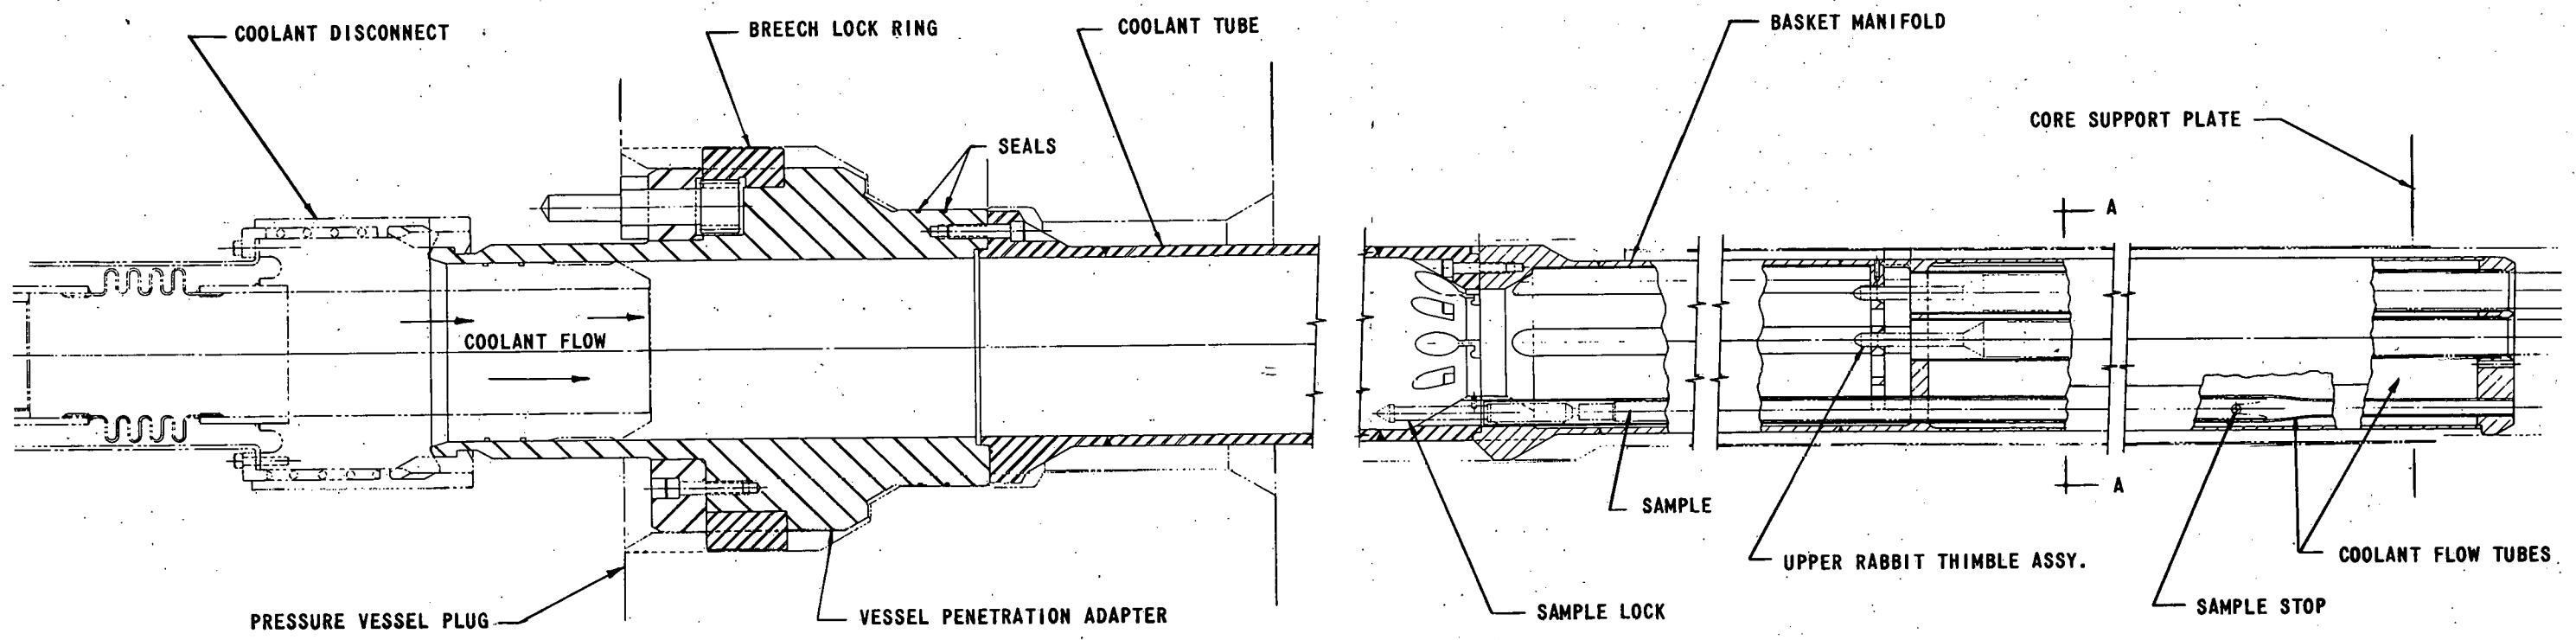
Sectional views of upper and lower Internal Thermal Column Assembly
